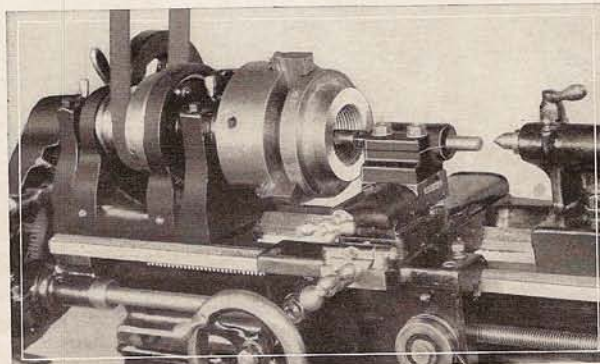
Cutting an Internal Thread in a Large Cast Iron Flange Held in the Chuck on a No. 22—9-inch Junior Lathe
